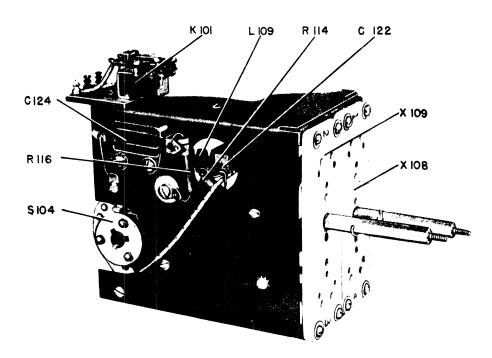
Transmitter Crystal-Bracket Assembly - Top View
